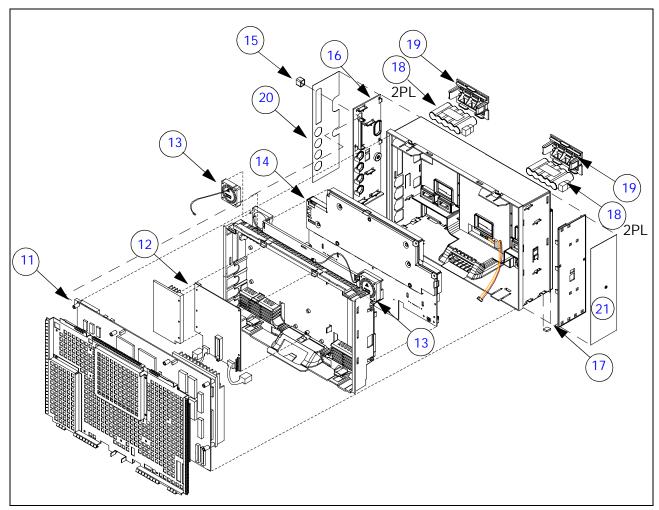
SC9000 Rear Housingl Subassembly - Replaceable Subassemblies - (see Table A-2).
